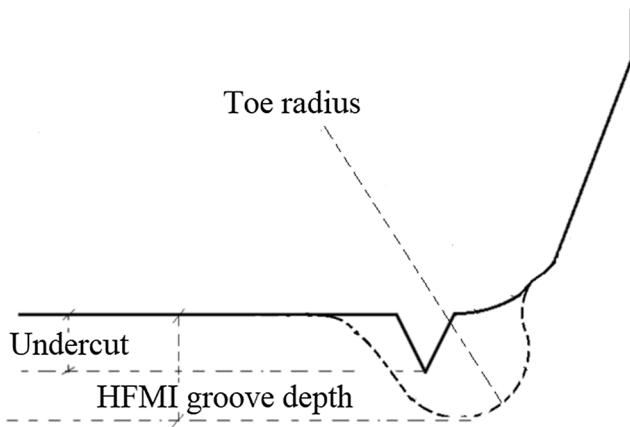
The investigated parameters in laser weld scanning.
